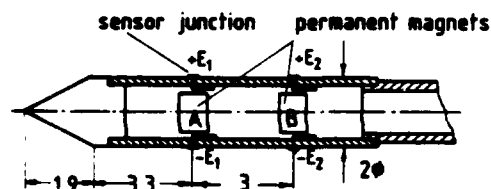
MINIATURE ELECTROMAGNETIC FLOWMETER PROBE - DIMENSIONS IN mm.
